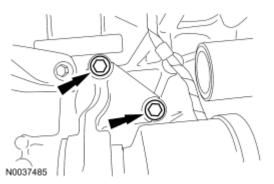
Locating RH Halfshaft Carrier Bearing Bracket Bolts Courtesy of FORD MOTOR CO.
